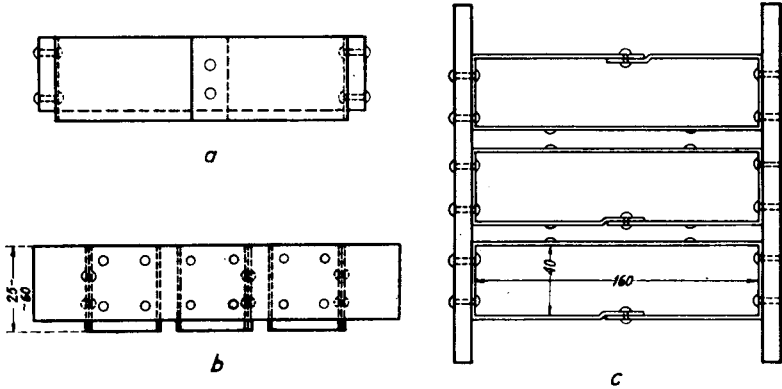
Auxiliary steel mold. Figures in millimeters.
